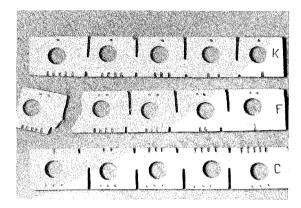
Laminex templates used to produce standard specimens. One section has been broken off the center template for demonstration purposes.
